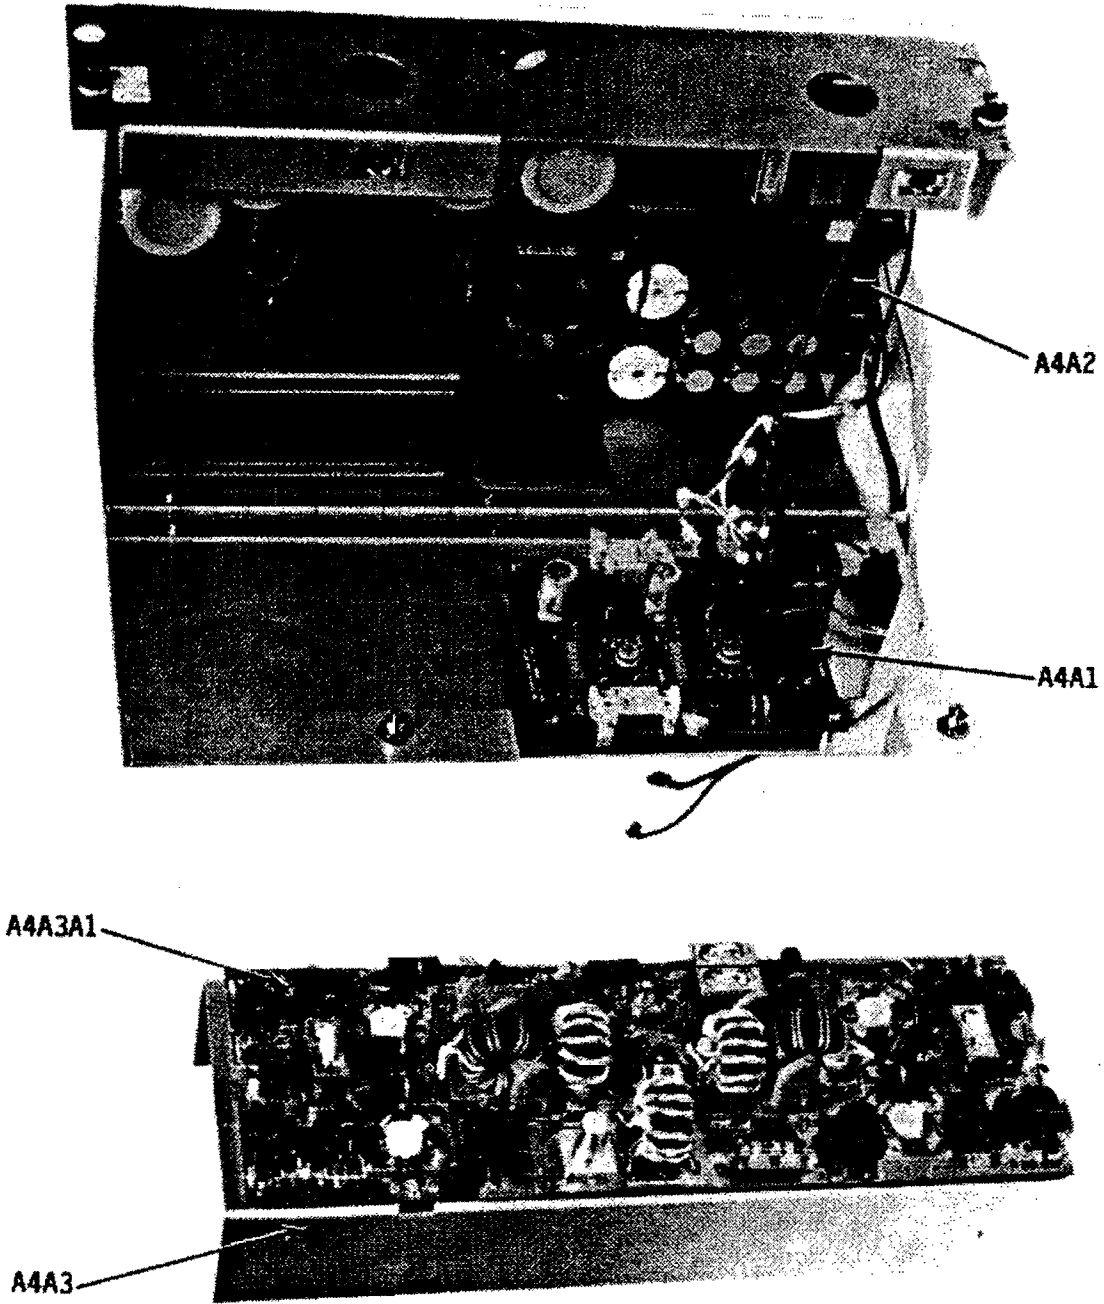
(Sheet 6/8) Major Assembly Locations.
